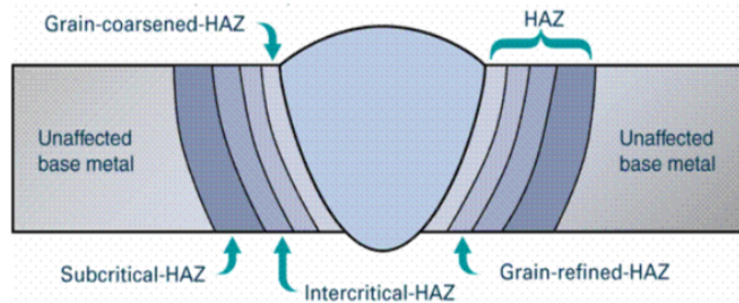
Areas of a welded joint from the fusion line.
